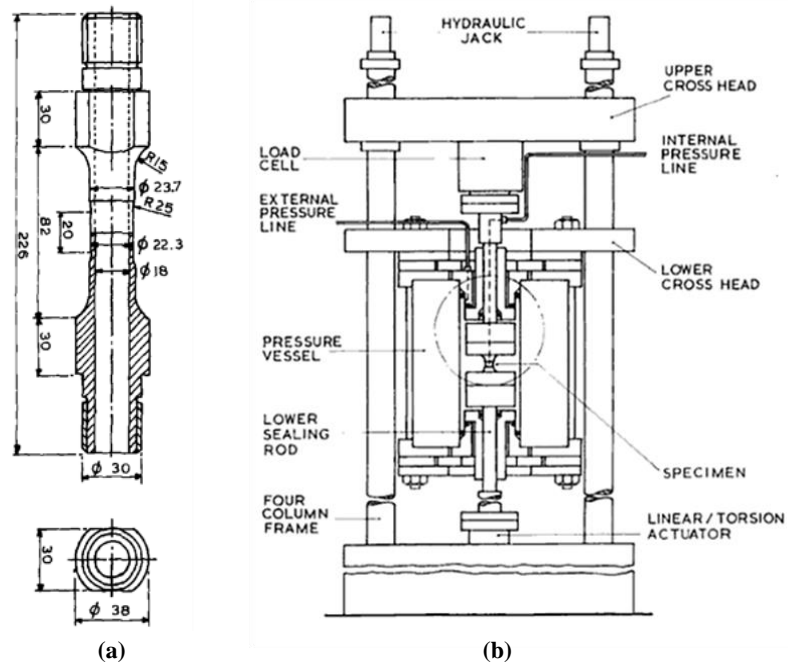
(a) Tubular specimen (dimensions in mm) and (b) multi-axial test system [20]
